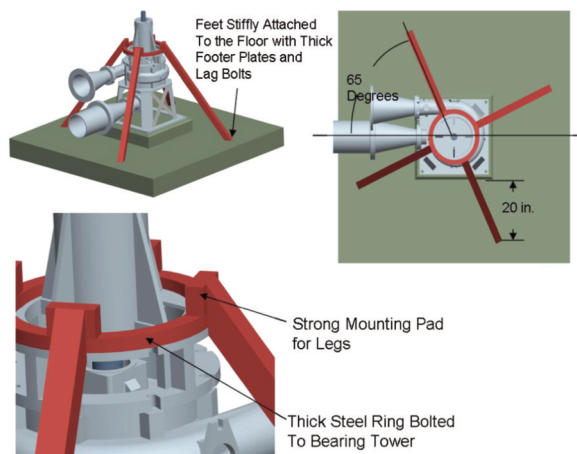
Solids Model of the Pump Assembly Showing the External Braces.
